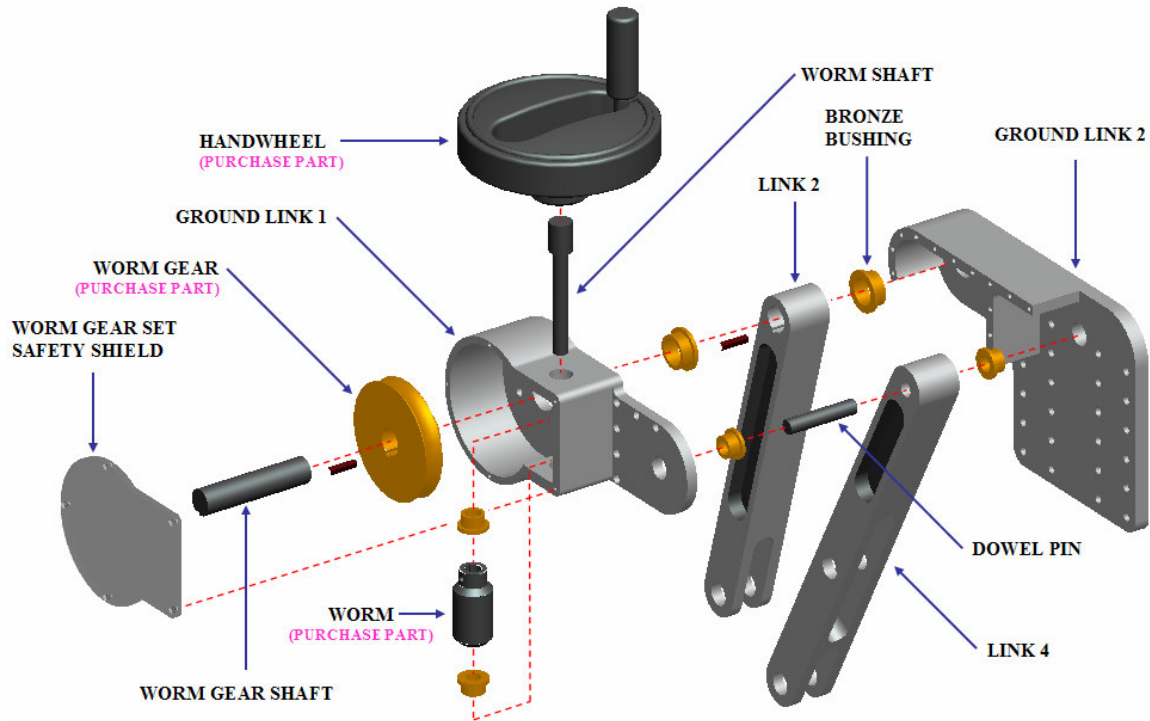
Gear set housing showing major assemblies: user interface/worm assembly and worm gear/controlling link assembly
